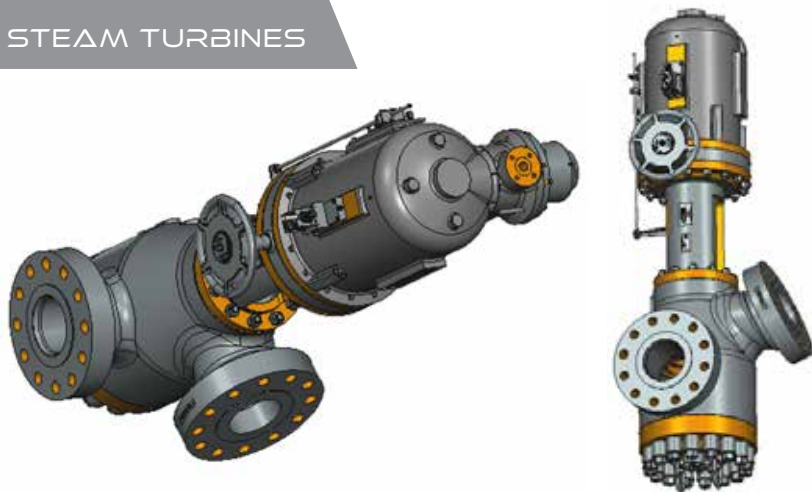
Gimpel oil-operated trip and throttle valve with unique steam section casting.
